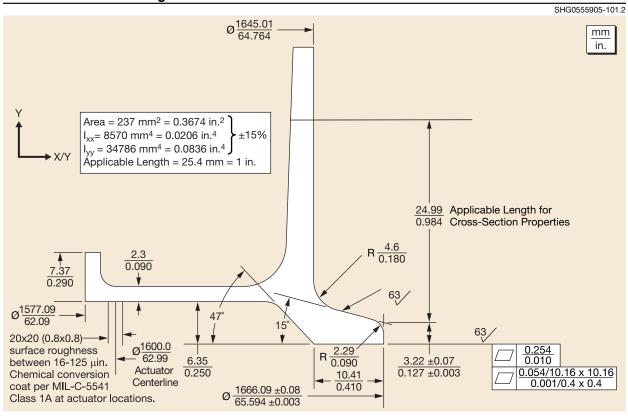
Dimensional Constraints on Spacecraft Interface to 1666-4 PAF
